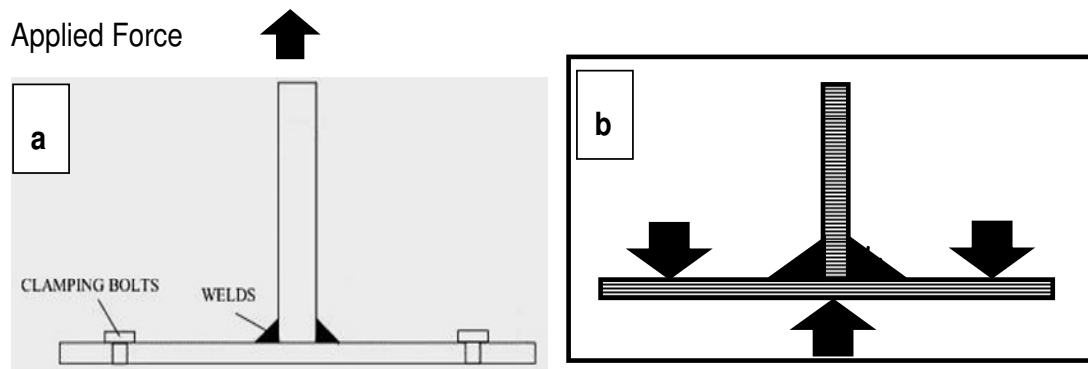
Principle of fatigue testing of fillet welds with two methods (a) pulling method (b) three point bend method.
